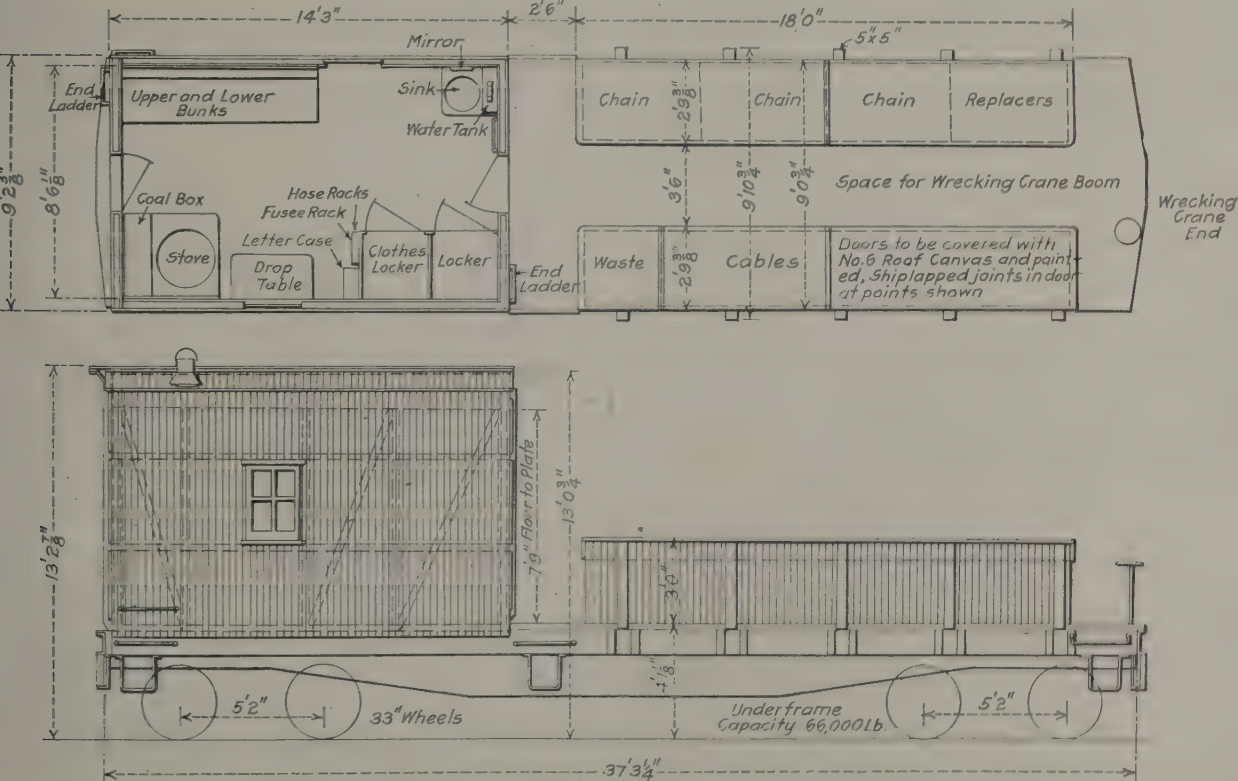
Canadian Northern Auxiliary Car for Wrecking Crane.
